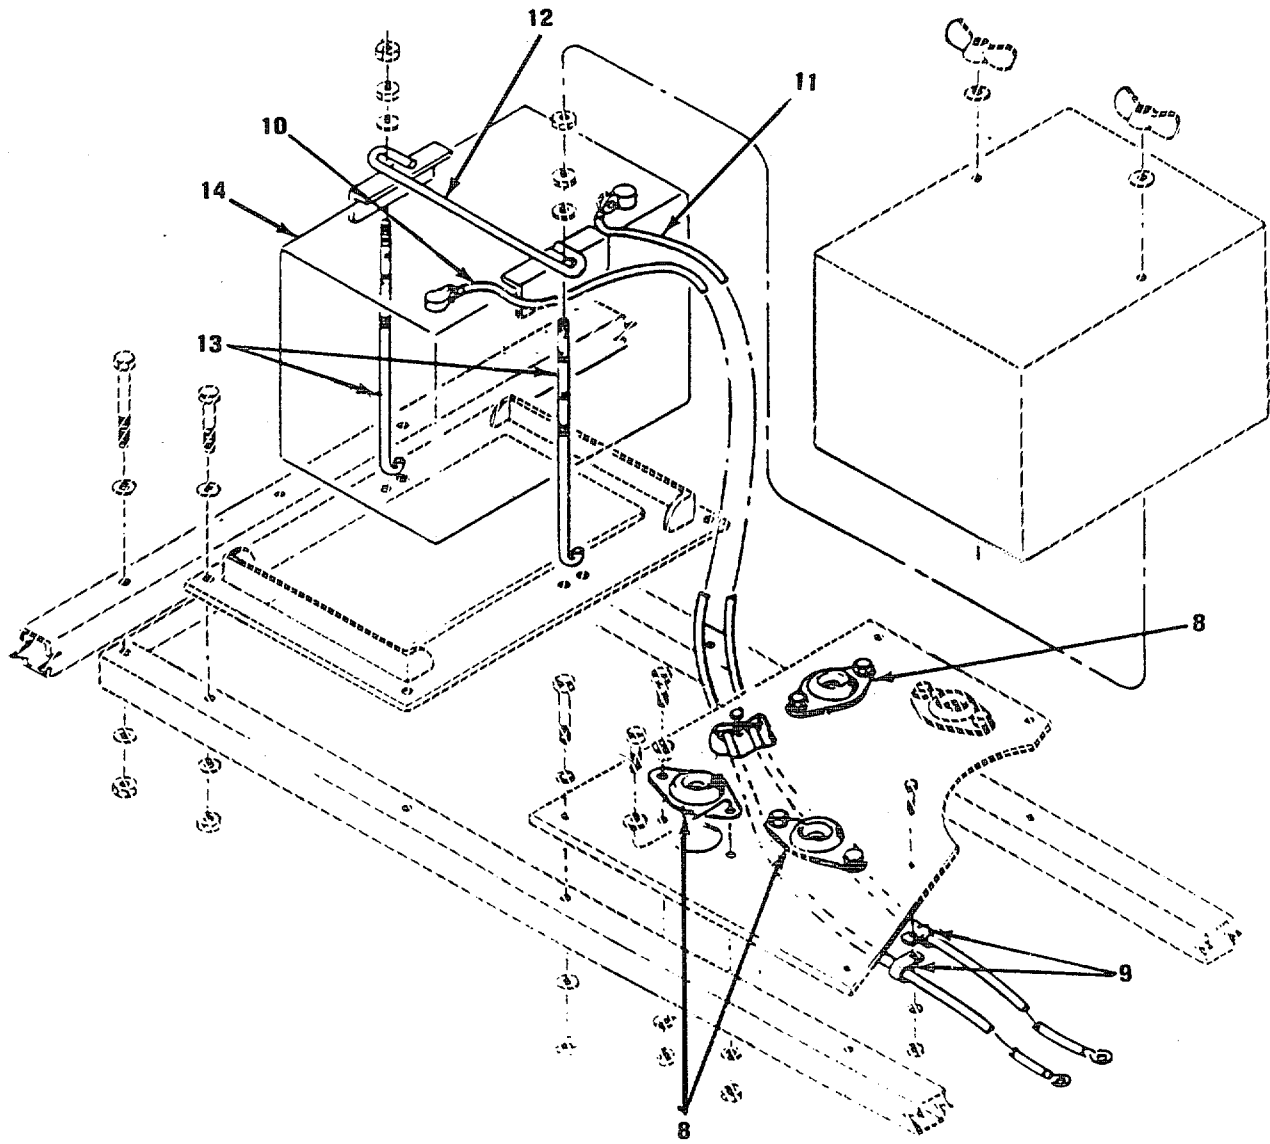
Battery/Hydraulic Assembly (Sheet 2 of 2)
